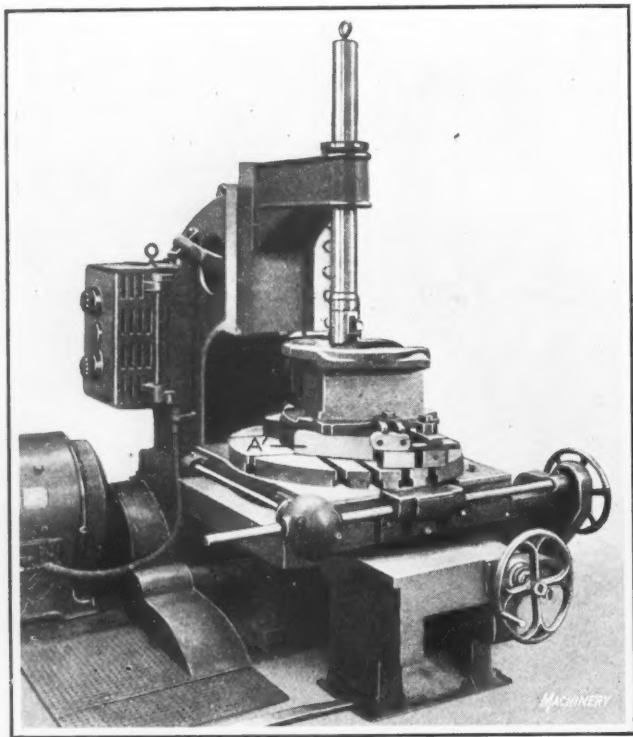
Use of Continuous Rotary Table Movement on the Slotting Machine for shaping inside of Locomotive Driving-box
